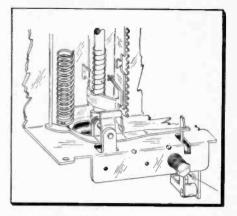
A popular toaster uses a latch that catches the release lever, preventing popup. As the thermostat heats, the latch slowly moves, eventually releasing the lever.
